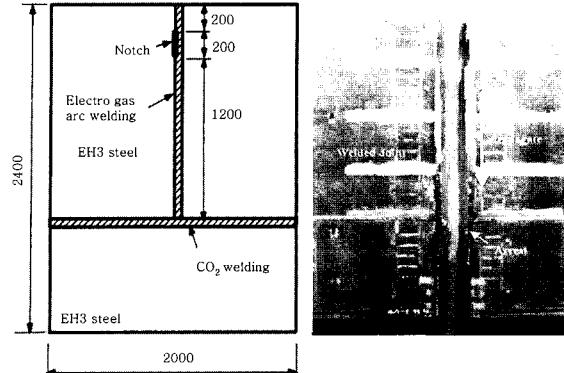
Brittle crack arrest by the base metal with high crack arrest toughness
